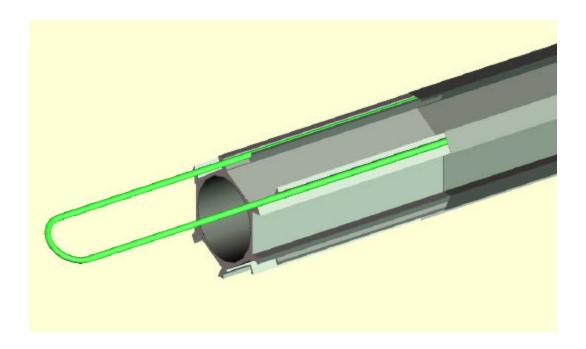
Coolant tube and outer carbon/epoxy shell slide on to Figure 44 assembly
